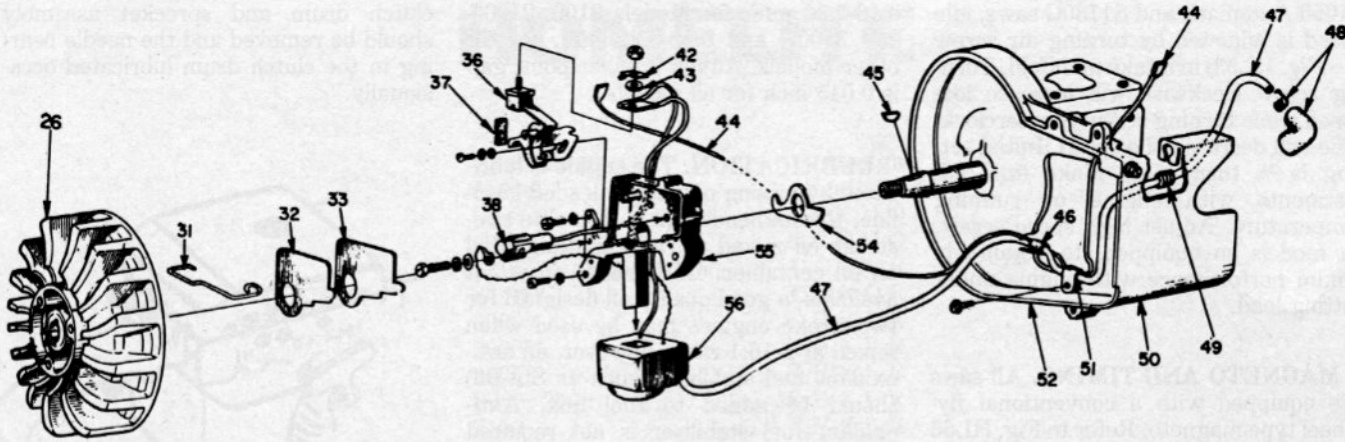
Exploded view of flywheel magneto assembly used on some models. Refer to Fig. HL57 for magneto which is also used on some models.
